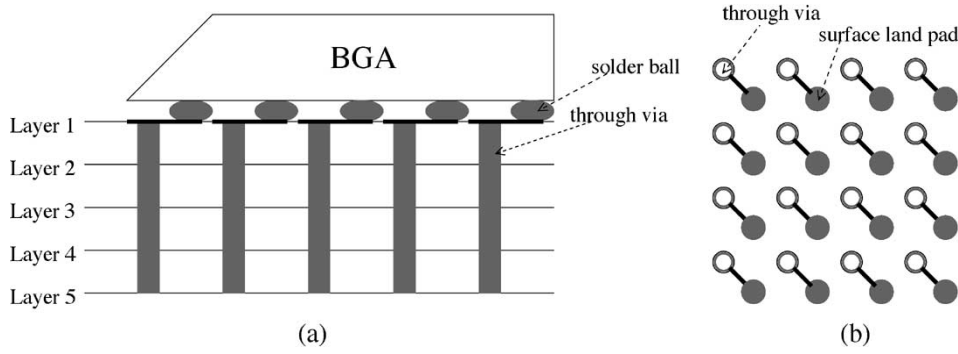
BGA package is mounted on a PCB, and through vias are used to connect component pins to inner layers of the board: (a) Cross-sectional view. (b) Top-side view. In the context of board-level routing, each through via here will be regarded as a component pin.
